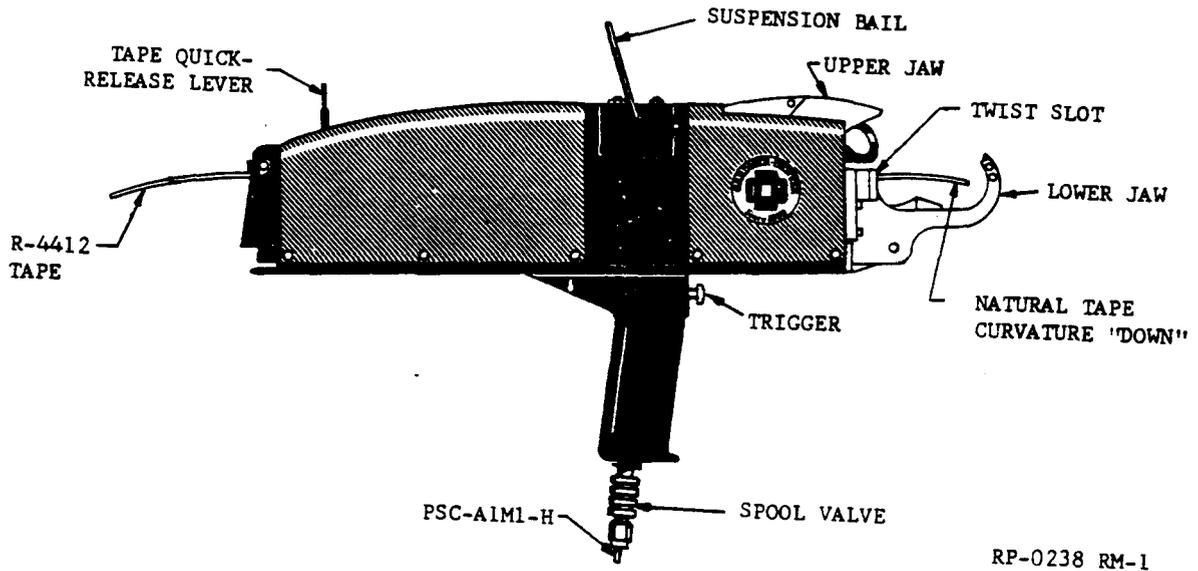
R-4411 L1 PNEUMATIC BANDING TOOL
